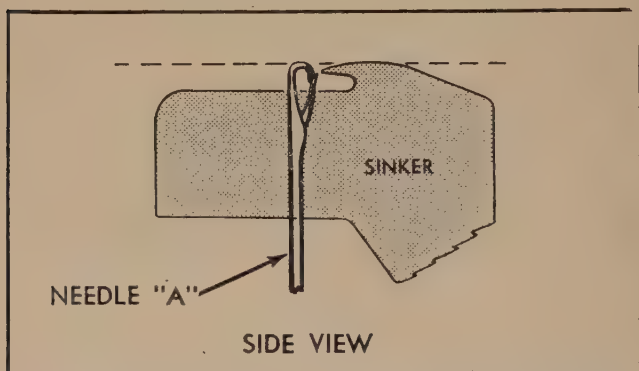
Locating Needle A (side view showing height with relation to sinker).
